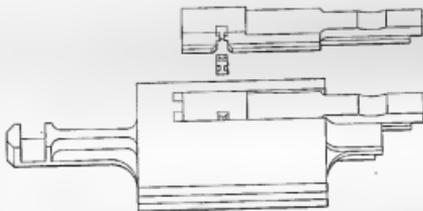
Monotype casting machine; matrix-holder for sorts-casting up to 14-point.
